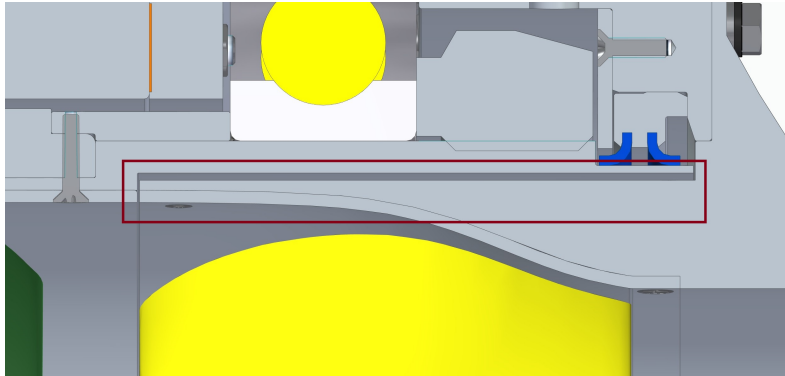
Rectangle indicates the problematic area between Rotor tube and Stator housing.
